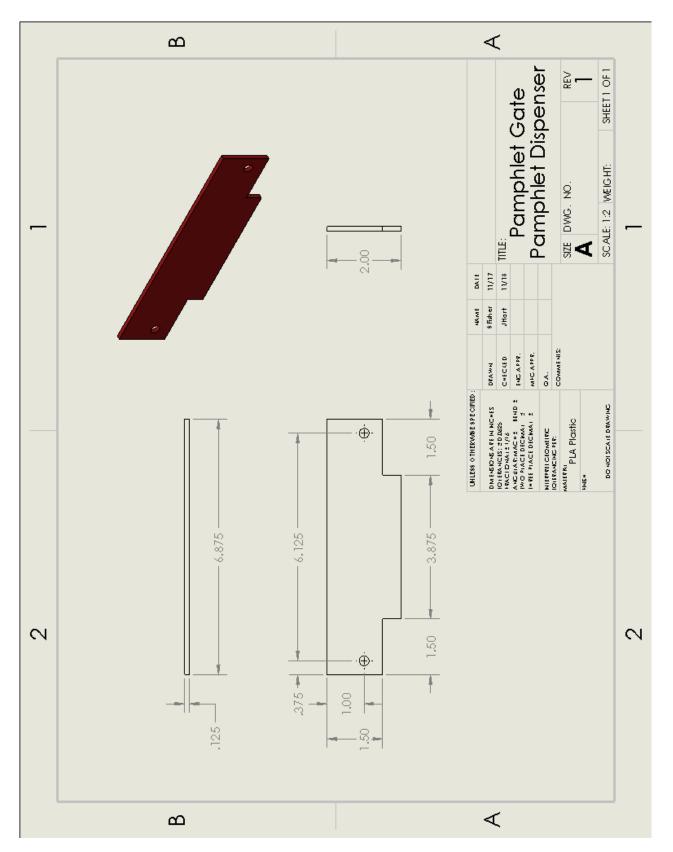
Prototype Pamphlet Dispenser Adjustable gate Drawing (not to scale)
